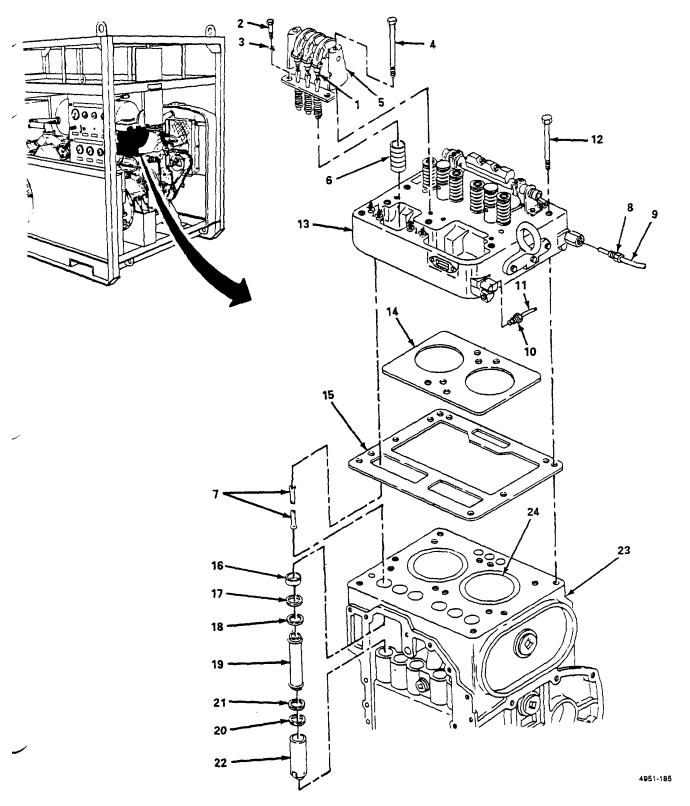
Valve Operating Mechanism, Install 4-61/(4-62 blank)
